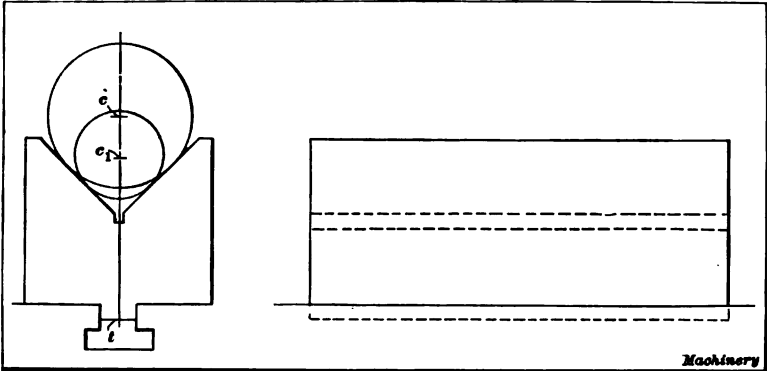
V-block for Holding Cylindrical Parts in Alignment with Machine Table
